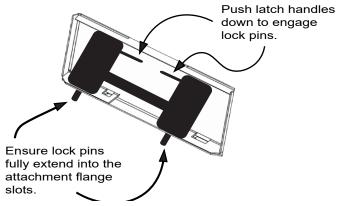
B QUICK ATTACH COUPLER LOCKED TO ATTACHMENT PLATE
